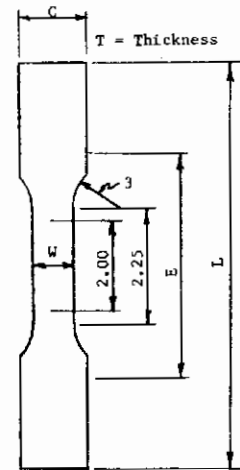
SPECIMEN FOR PLASTIC SHEET, PLATE & MOLDING
